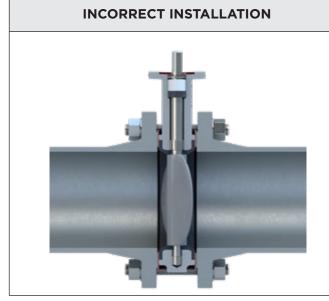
Insert Resilient Seated Butterfly Valve Between Flanges
